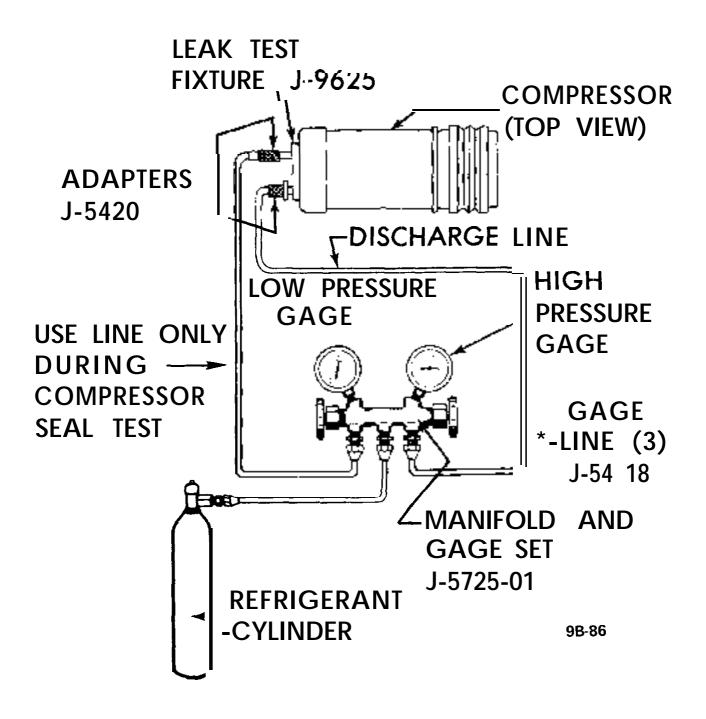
B-112 Leak Testing Shaft Seal and Seal Seat O-Ring
